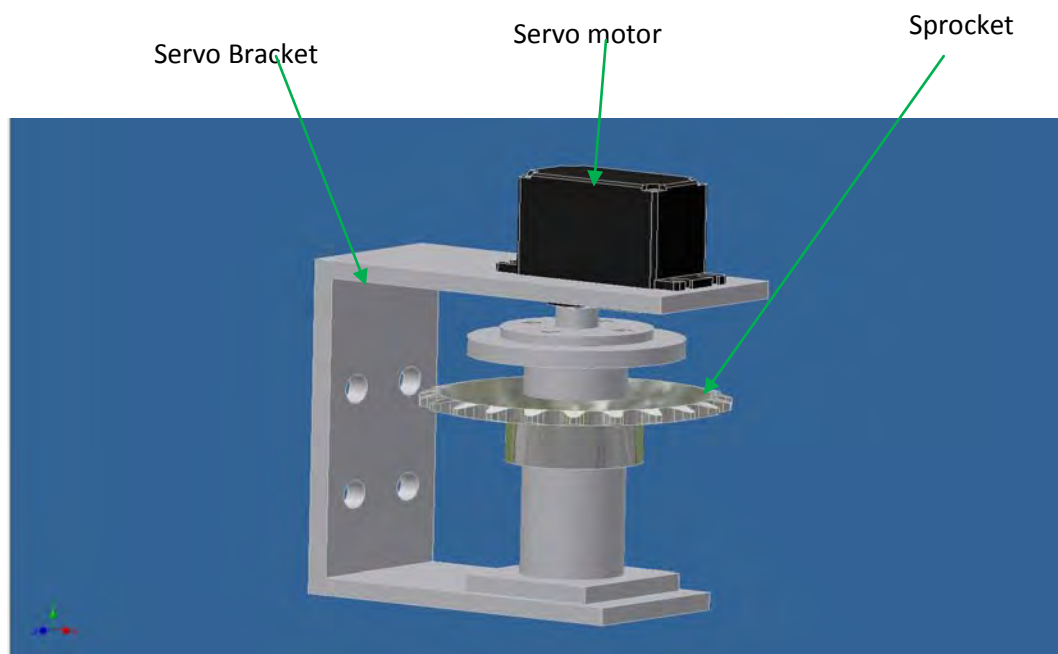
CAD Drawing of the Chain and Sprocket System for the Steering Mechanism
